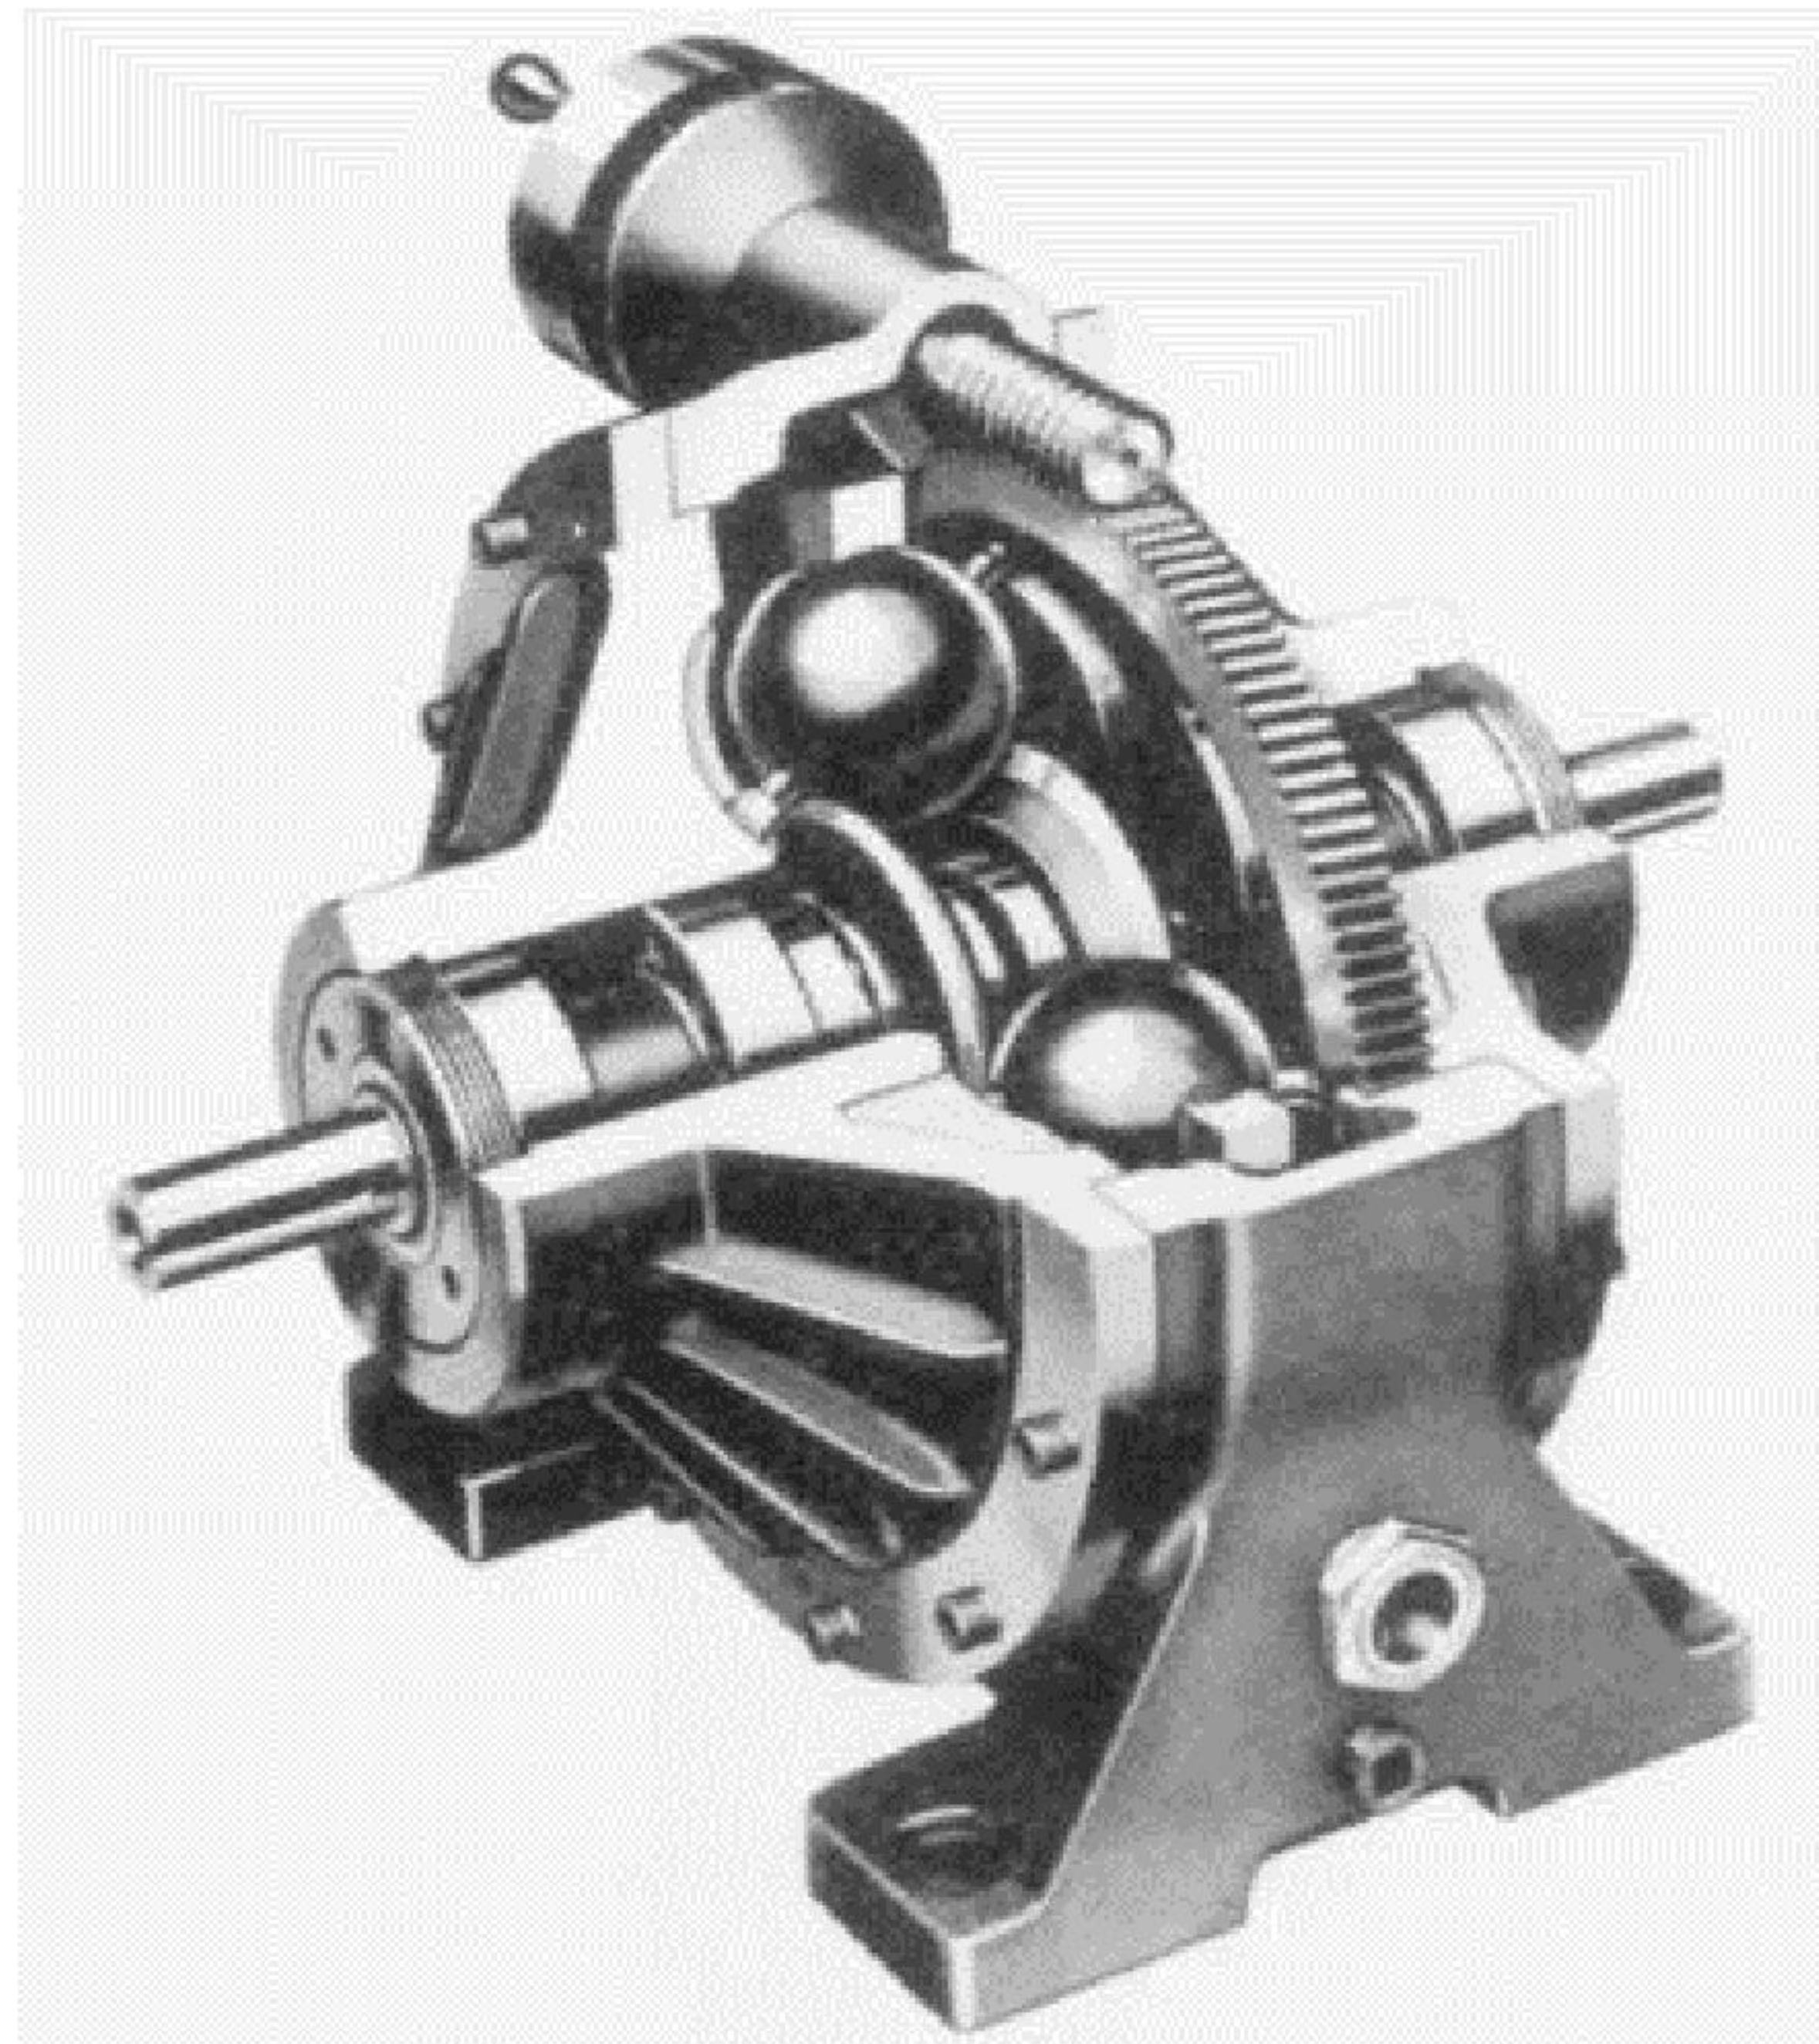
Drive with metal surfaces in frictional contact. (*The Cleveland Worm & Gear Co.*)
